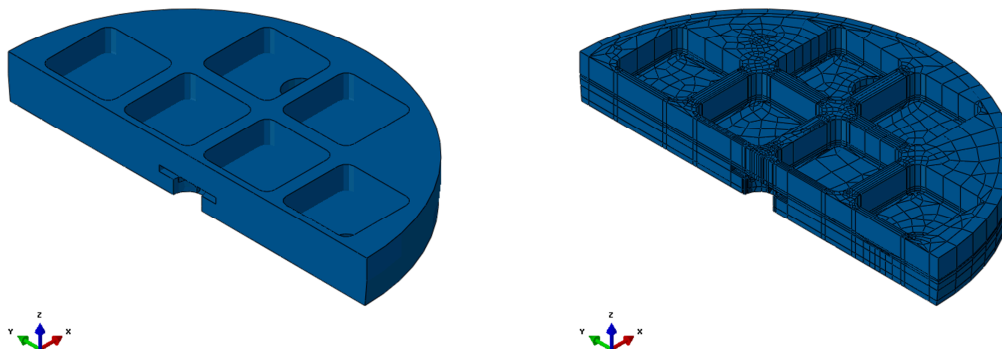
Insert BWR geometry (left), and mesh (right) – base plate. Symmetrically positioned channel tubes.
